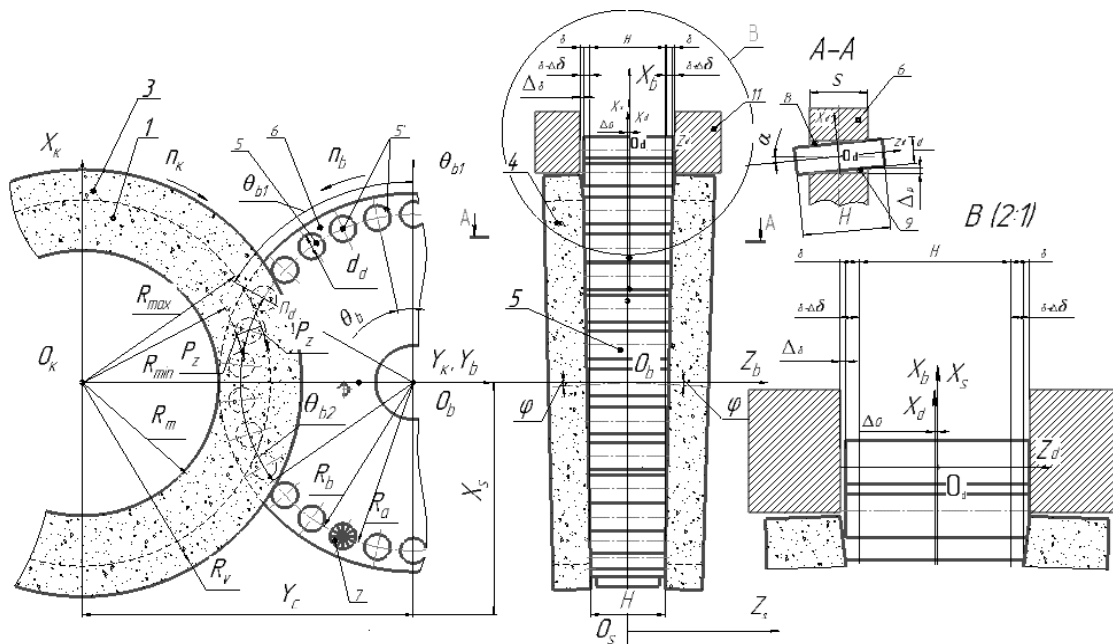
Scheme for machining of bearing rollers 5 and pushers 5', which rotate in the holes of the feeding drum
